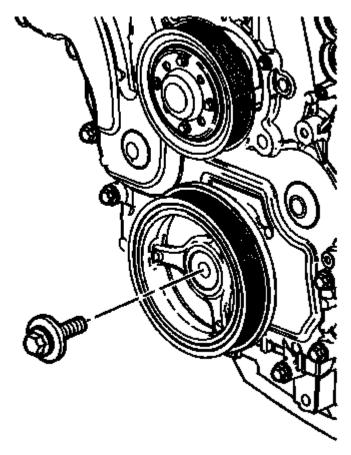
Identifying Crankshaft Balancer Bolt Courtesy of GENERAL MOTORS COMPANY
